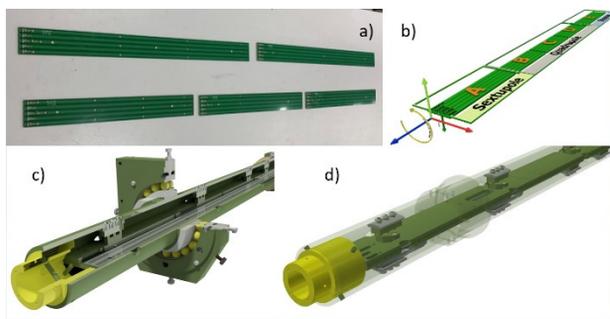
Measuring probe design: a) PCB coils arrays; b) boards arrangement inside unit; c) and d) internal design of the probe.
